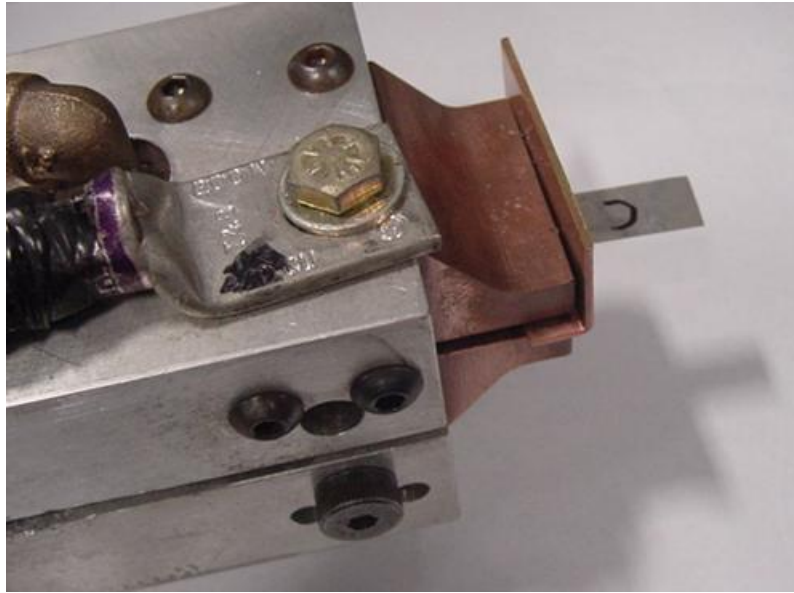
Close-up of Clamping Jaws of Tab Joint Disassembly Tool
